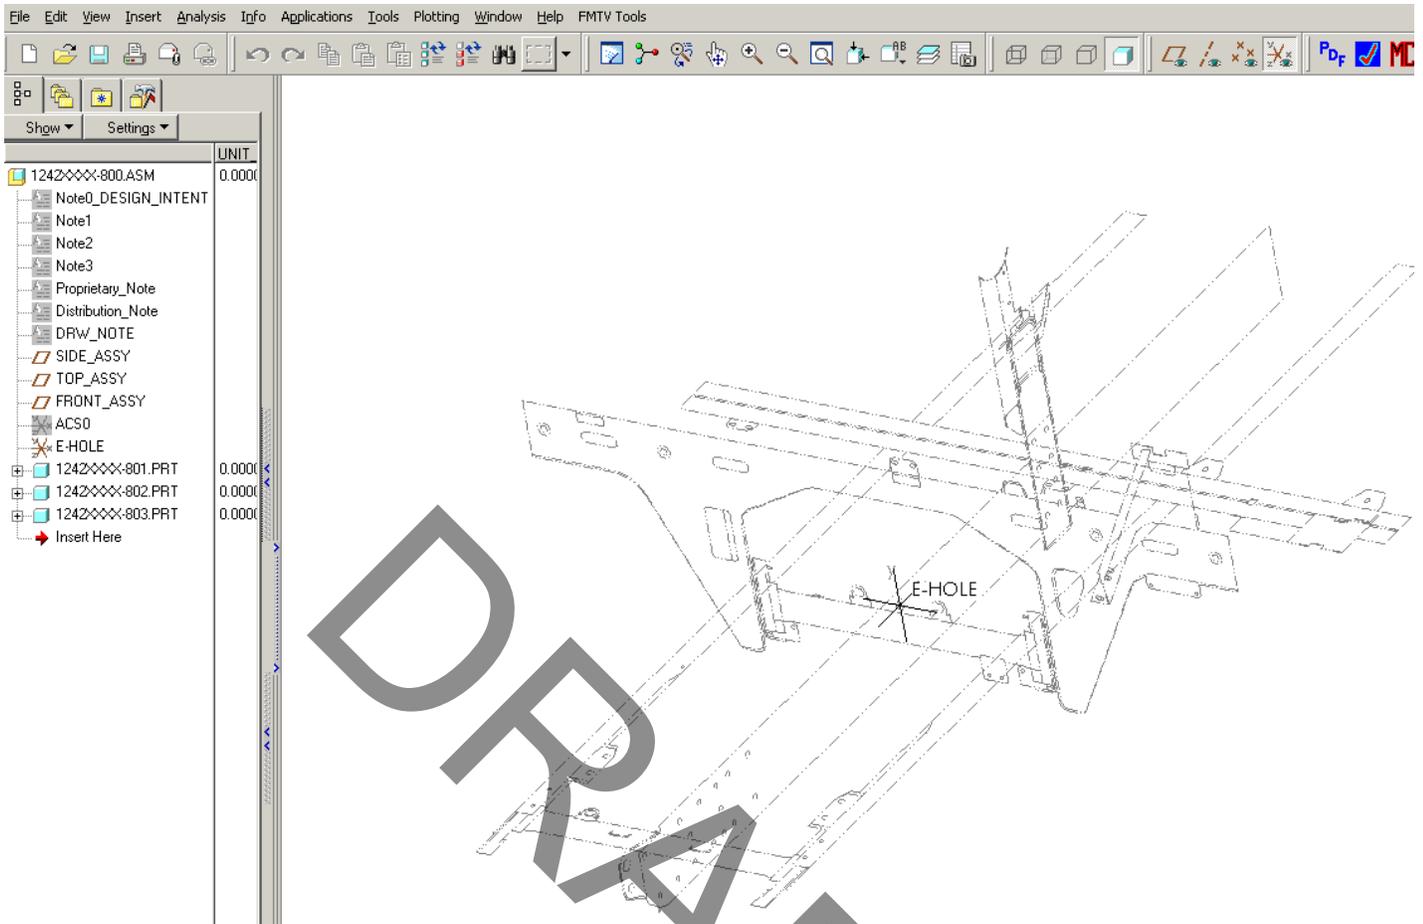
COMPLETED LIGHTWEIGHT ASSEMBLY
